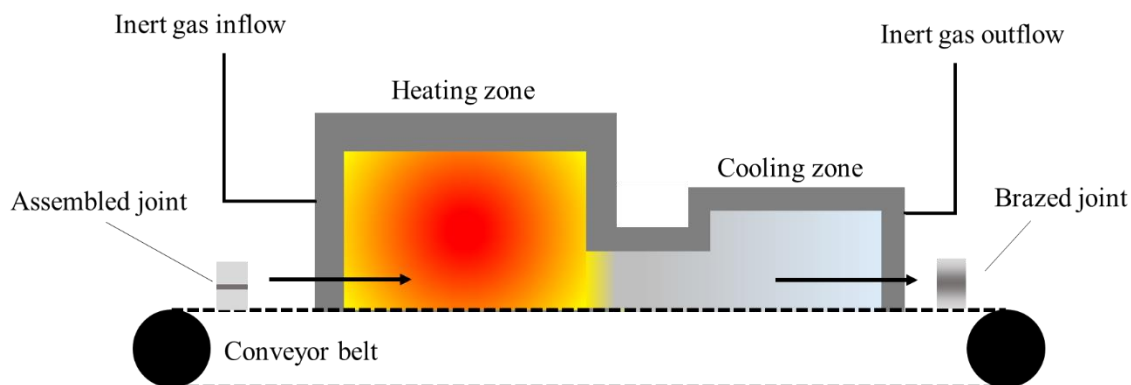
Schematic of basic continuous belt furnace set-up.
